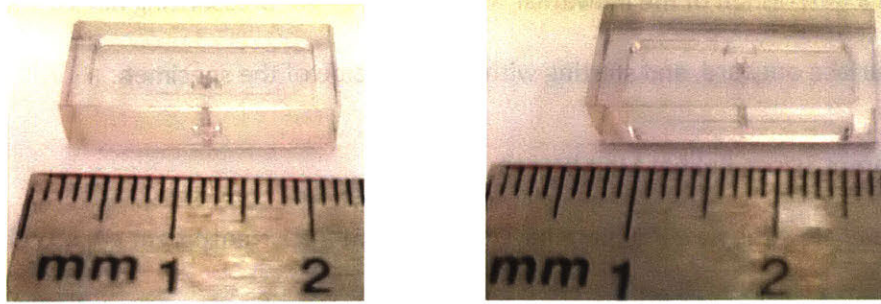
Transparent polycarbonate housing after machining followed by vapor polish. Left: specimen-facing side (front) of housing where transparent membrane fits in recess. Right: outside-facing side (back) of housing where O-ring seal fits in recess.
